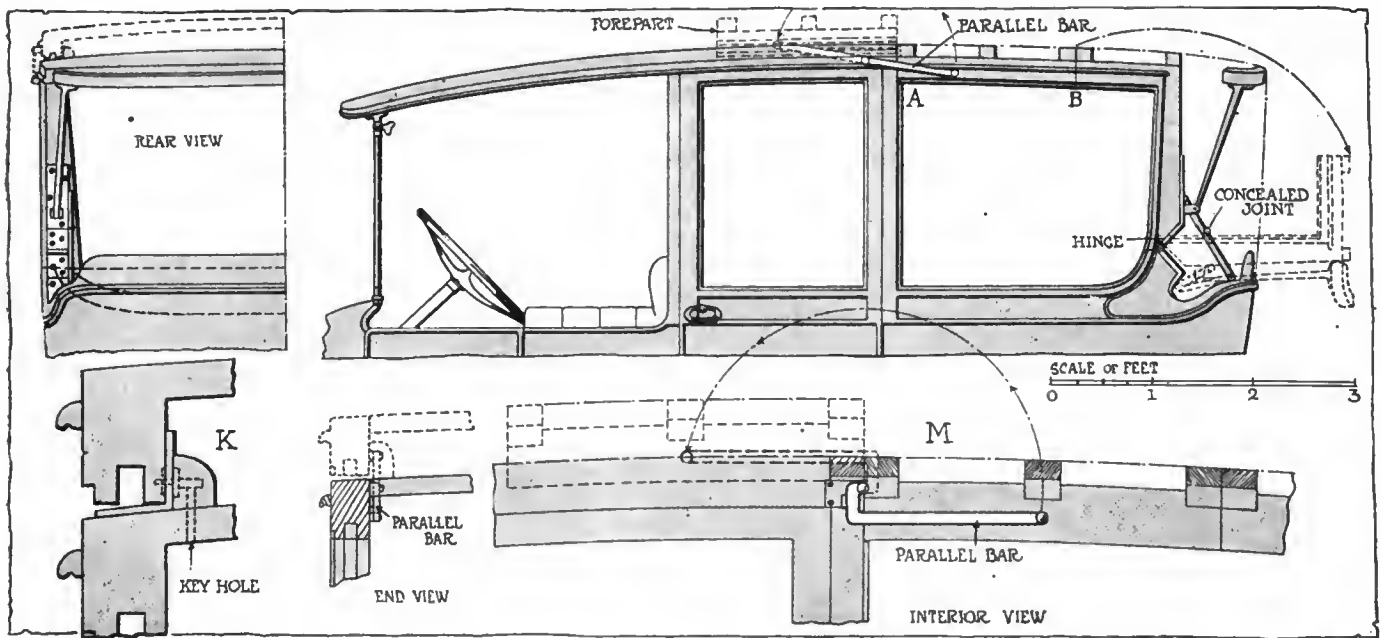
Scale drawings of folding top for limousine-landaulet, showing also alternative method of fitting parallel bars to the top section
